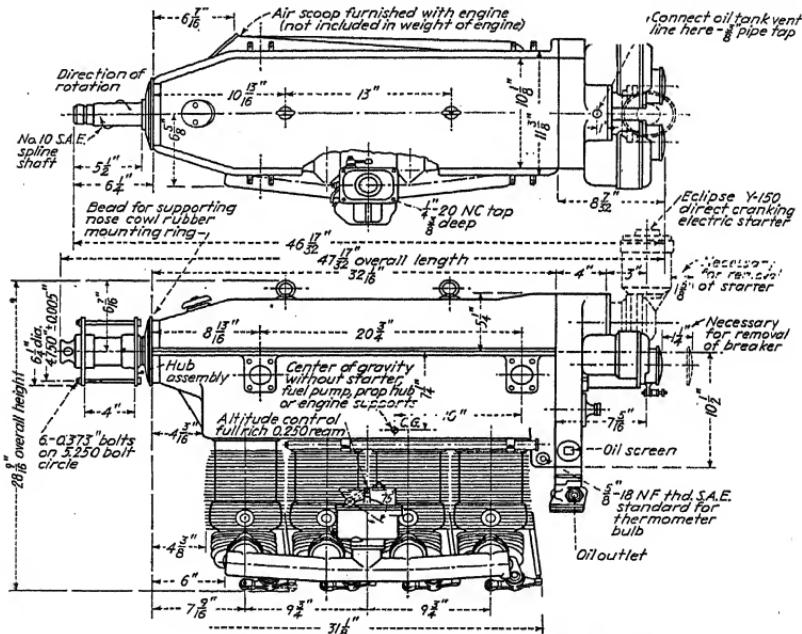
Lengthwise dimensions for installing Pirate engine.
